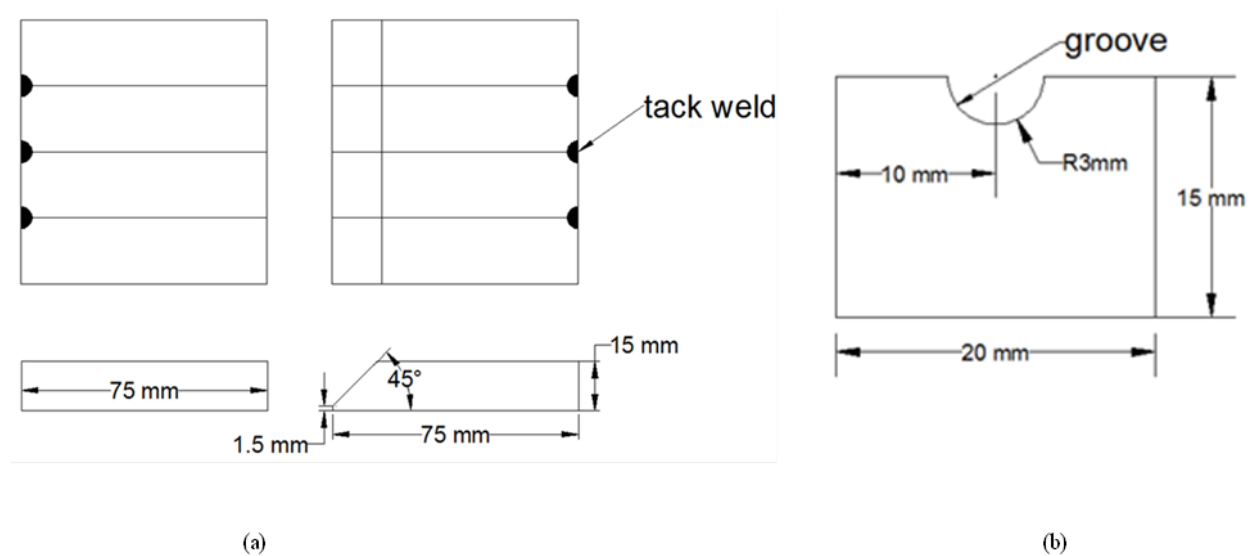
(a) Split and beveled bars for multi-pass welding (b) Grooved bar dimensions for single bead welding
